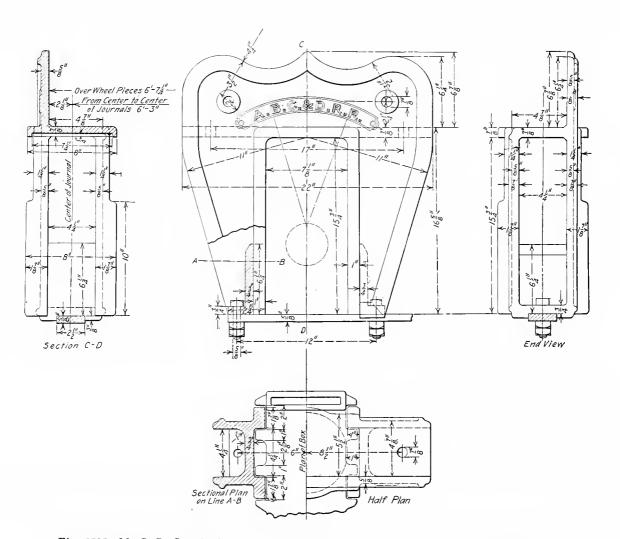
M. C. B. Standard Pedestal for 31/4 in. by 7 in. Journal. (M. C. B. Sheet 21.)
